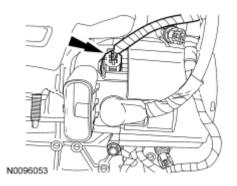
Locating Generator Electrical Connection Courtesy of FORD MOTOR CO.
